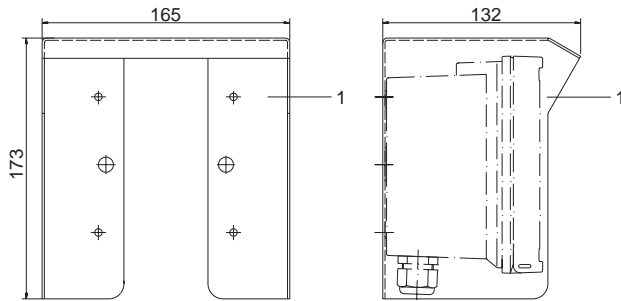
ZU 0276 protective hood for wall and pipe mounting
